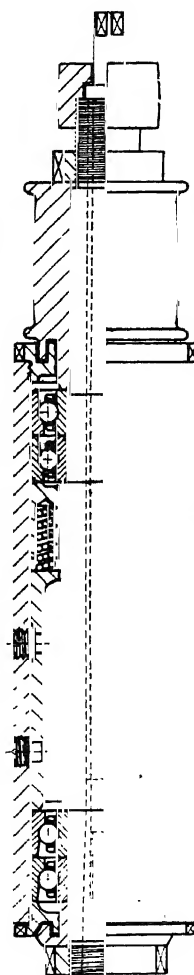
Angular-contact ball bearings preloaded by means of spring pressure.
